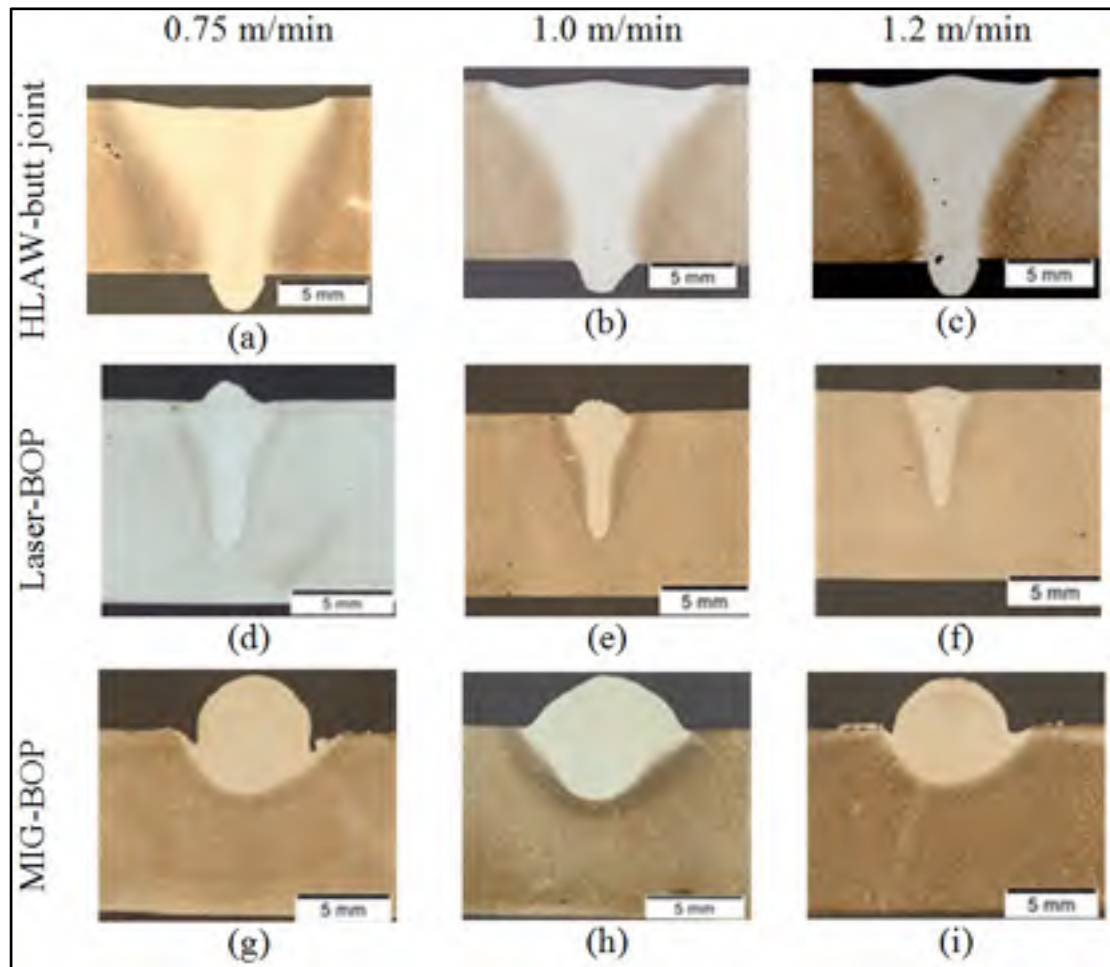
Transverse cross-sections of welds manufactured at different welding speeds for the three welding processes: (a, b, c) HLAW, (d, e, f) LW and (g, h, i) MIG
